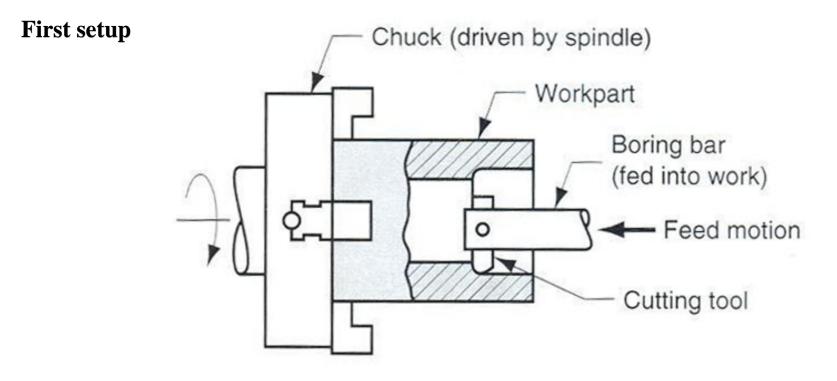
First setup of boring; boring bar is fed into a rotating workpiece.
